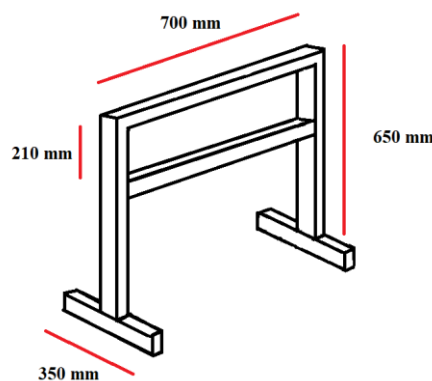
Workshop tool hanger platform design by lecturer for welding practicum
